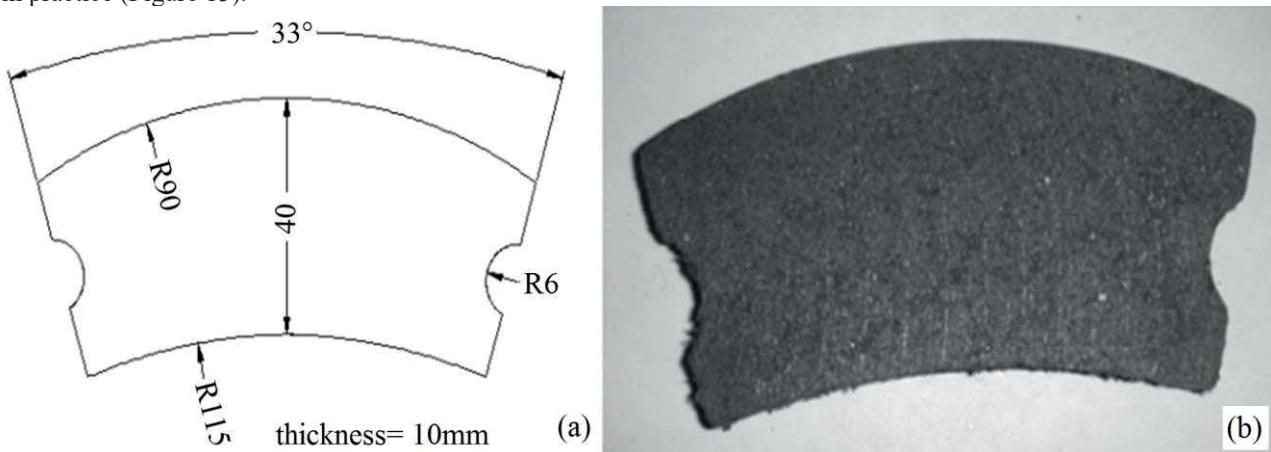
The brake pad manufactured by PSM: a) technical drawing, b) photo image
